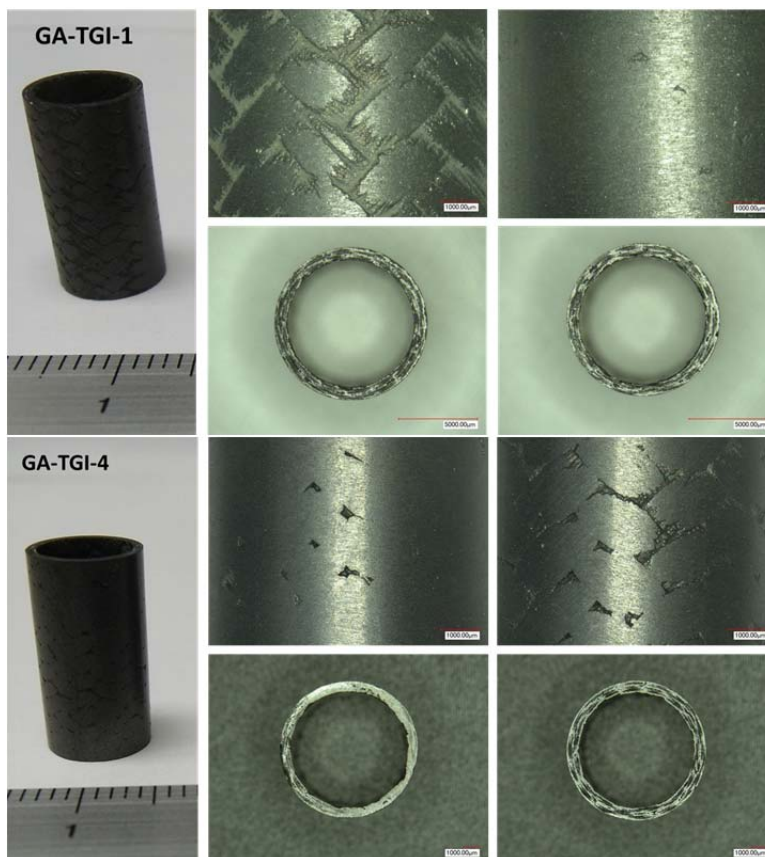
Pictures of SiC composite tube specimens GA-TGI-1 (top) and GA-TGI-4 (bottom)
